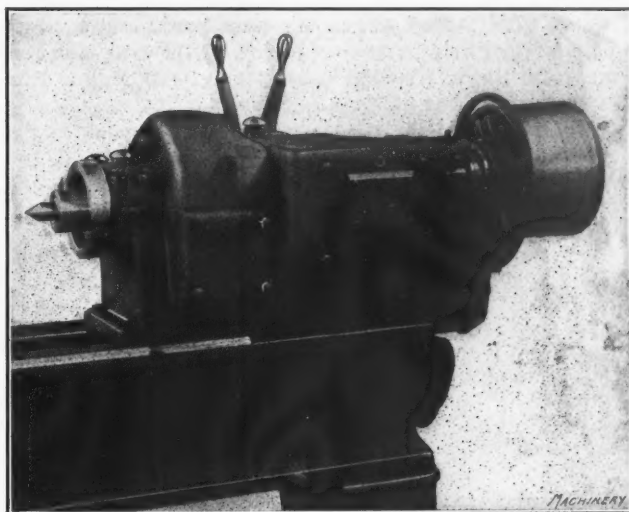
Rear View of Lodge & Shipley Selective Head Lathe
